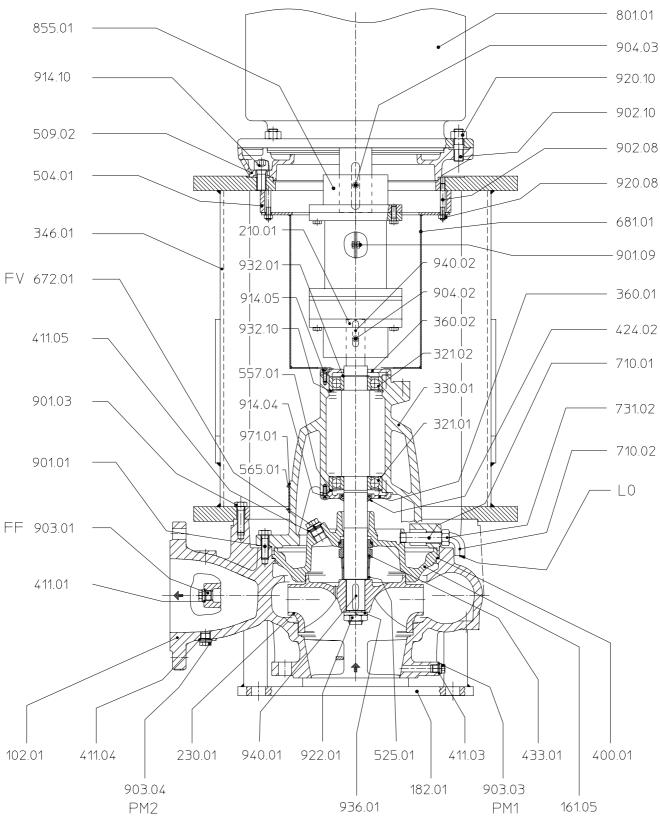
U3...D Unbalanced mechanical seal Base installation
